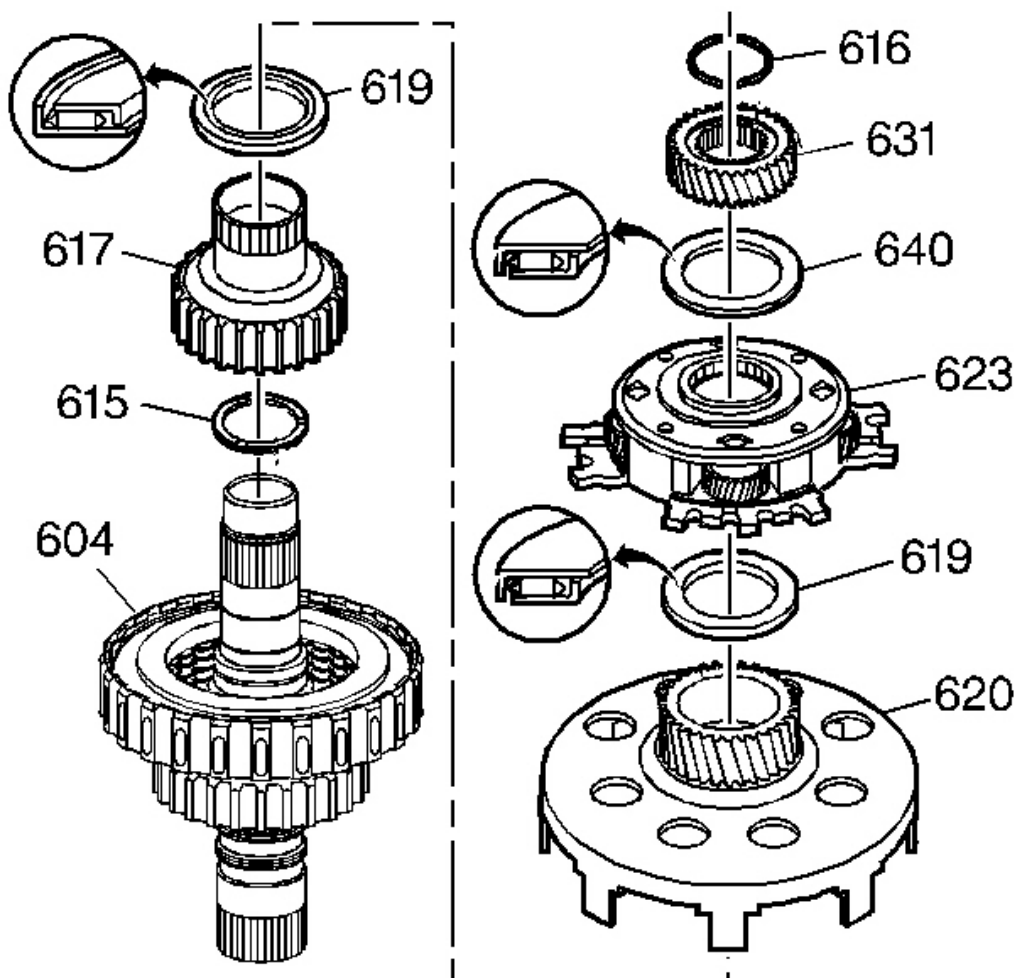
Identifying Reaction Sun Gear And Shell Assembly, Reaction Carrier
